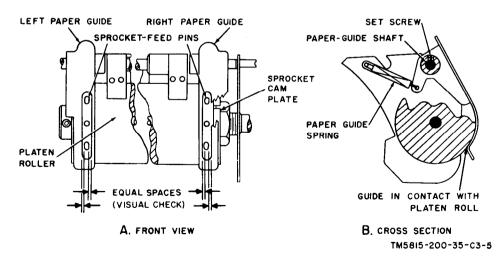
Paper guide and platen sprocket assembly friction adjustment requirements.
